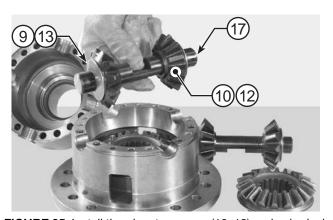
Install the planetary gears (10, 12) and spherical shoulder washers (9, 13) onto the shafts (17). Install the planetary set.
